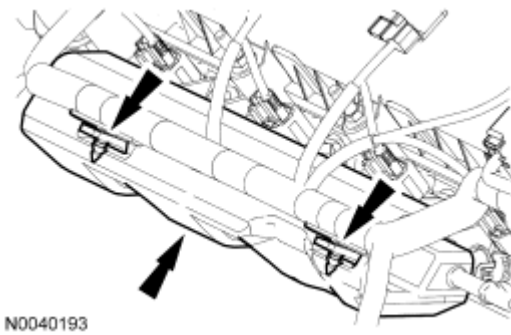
Locating Pin-Type Harness Retainers And Remove Fuel Supply Rail Insulator
